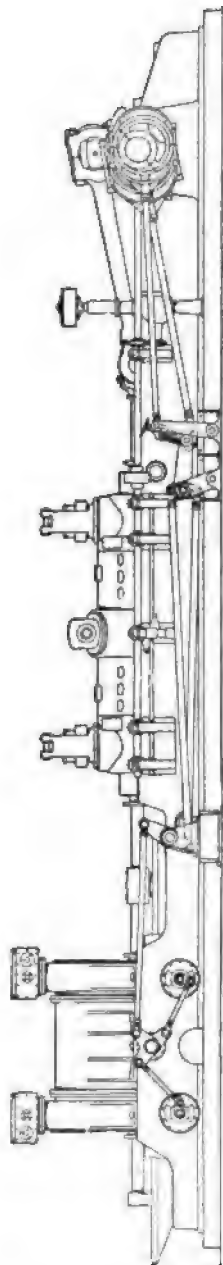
BLOWING-ENGINE VALVE-GEAR.
